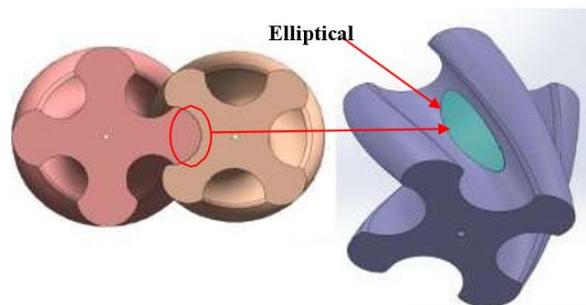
b) Rotors contacts in the screw compressor model represents elliptical conjunction
